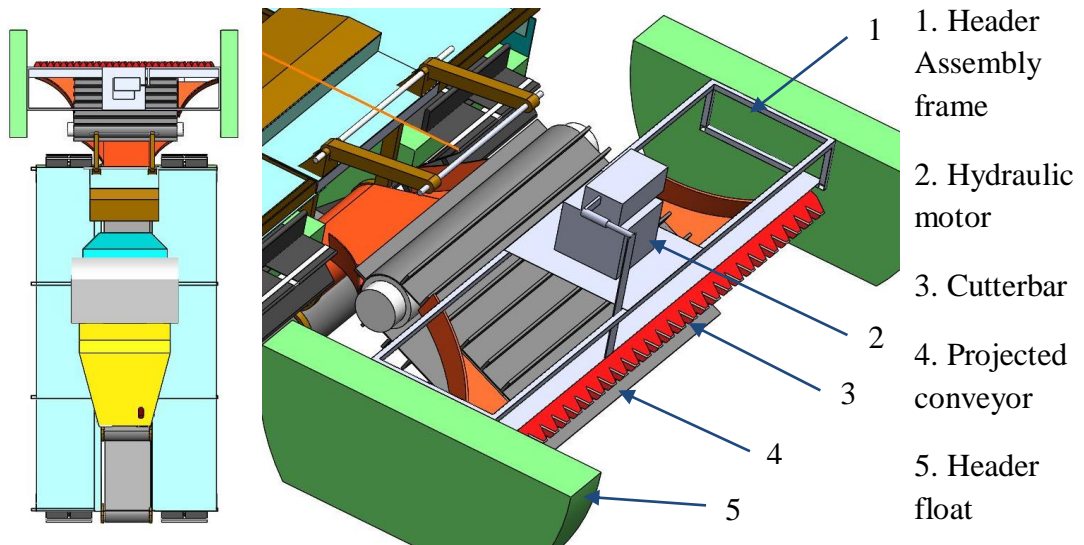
(a) Top view (b) Floating type cutter header Assembly
